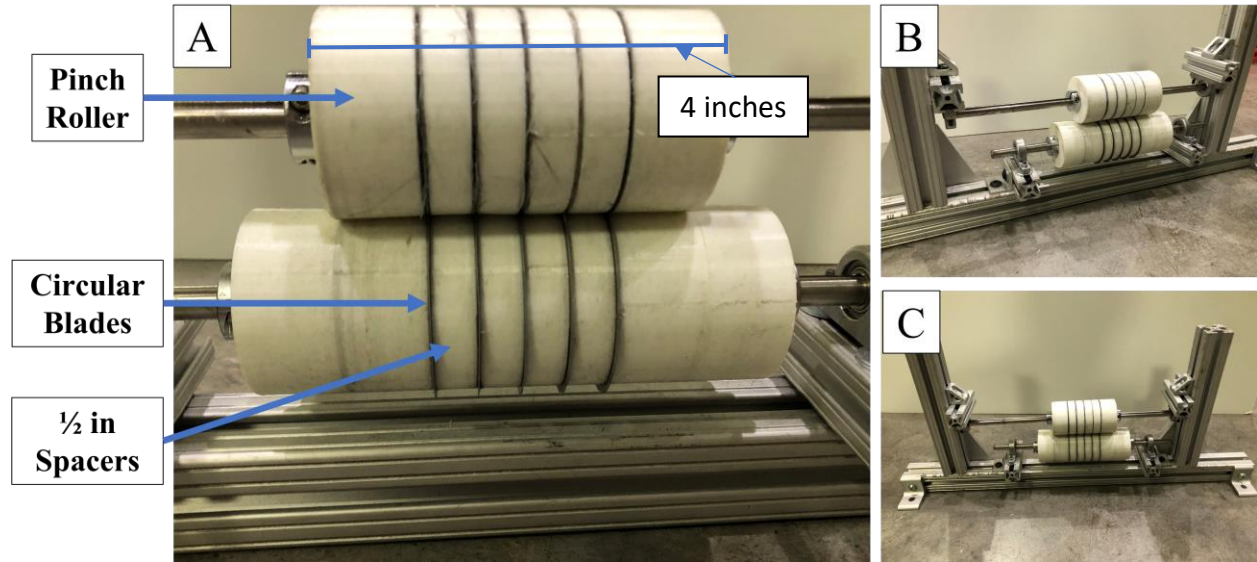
Tape Slitting system. (A) large view of tape slitting. (B & C) close up of AM manufactured spacers and pinch rollers. This system was designed to allow for the ease of taking on and off the line by the removal of two bolts. Five blades are attached to continuously slit 4 one half inch tapes to be placed on an automated tape placement system.
